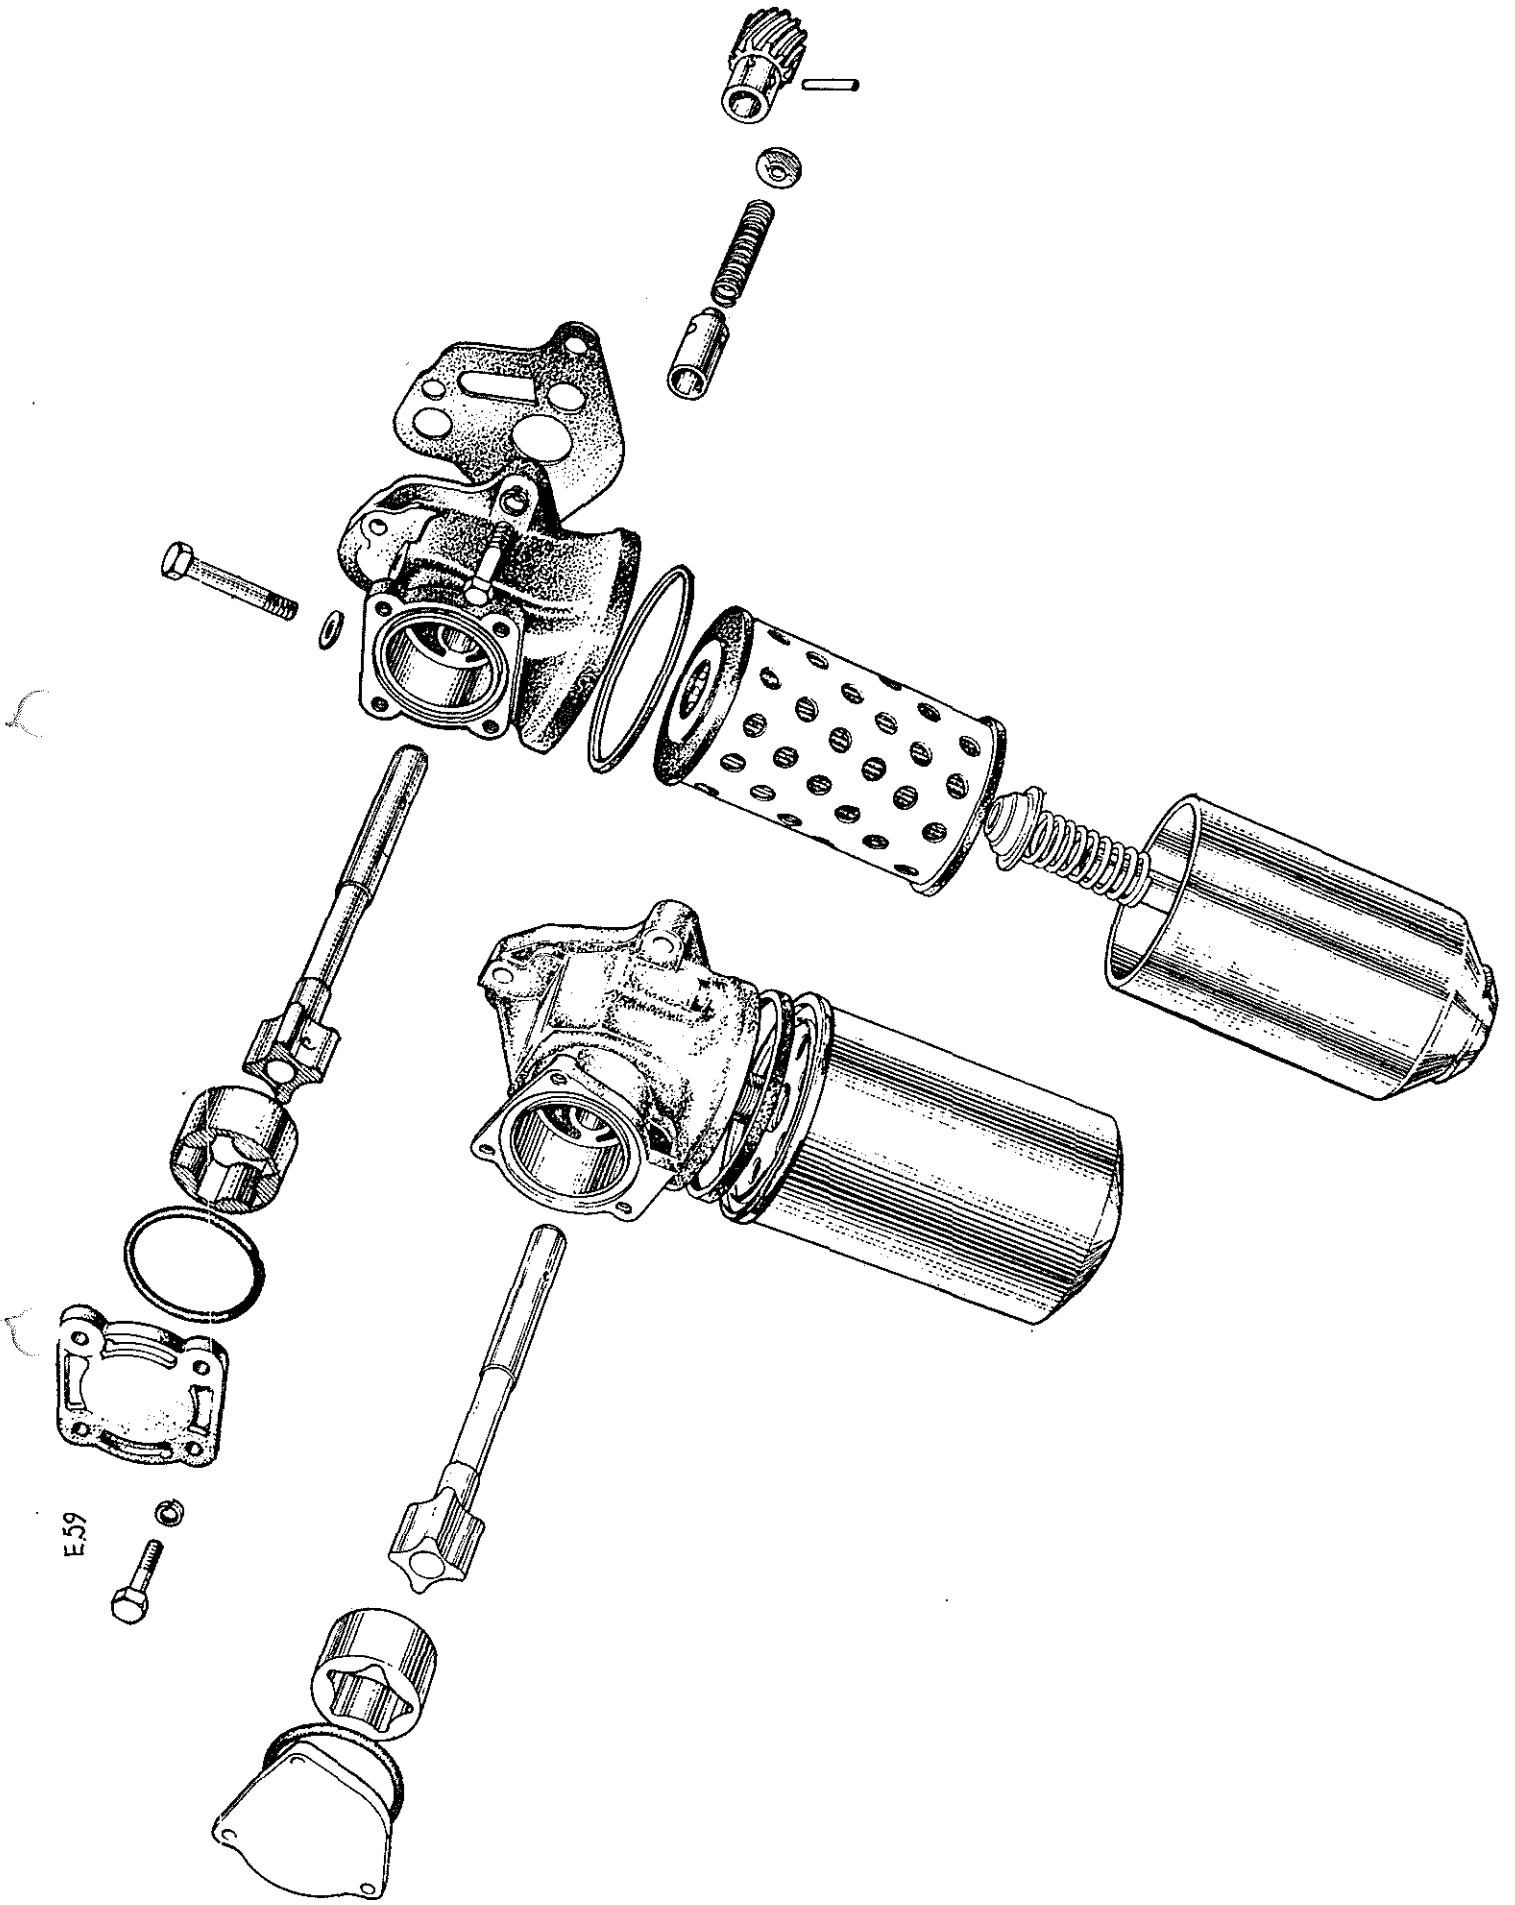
LUBRICATING OIL PUMP AND FILTER COMPONENTS
